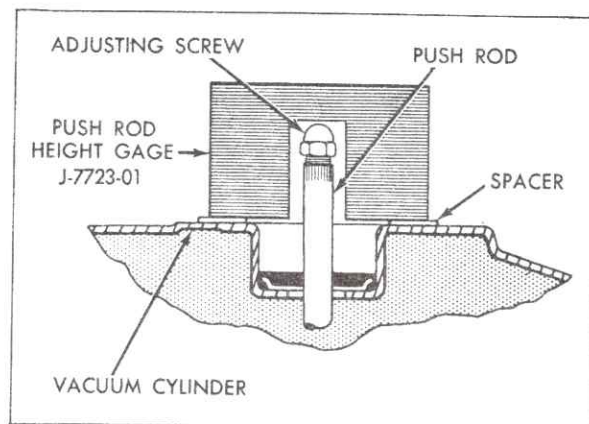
Checking Bendix Push Rod Height with Spacer
